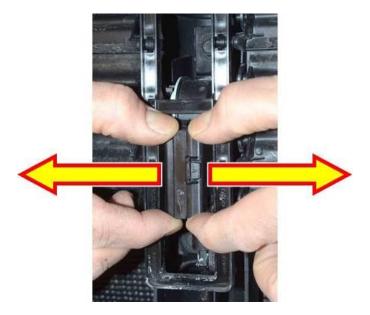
Attempt To Separate Actuator Motor Case Housing Halves
